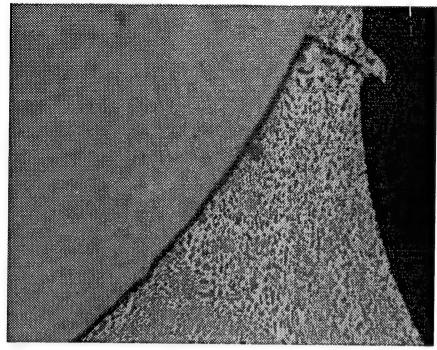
Microsection of Alloy 42 Gullwing Lead from Vendor A Showing Solder Joint Fractured at the Lead Interface.
